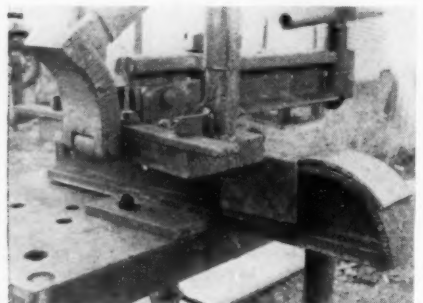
Bending members raised and swung to one side to permit removing bumper iron.
